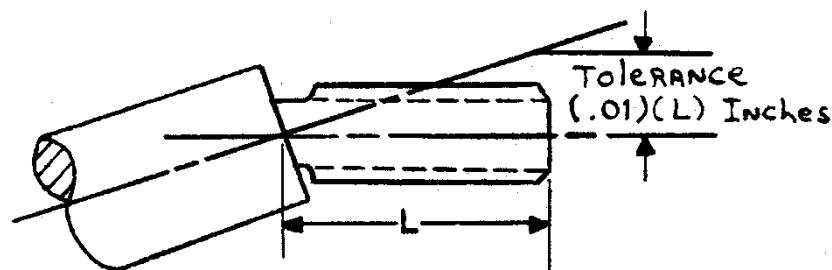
Screw Thread Perpendicularity (Ref: DI6-072 rev. 10, Original source unknown)
